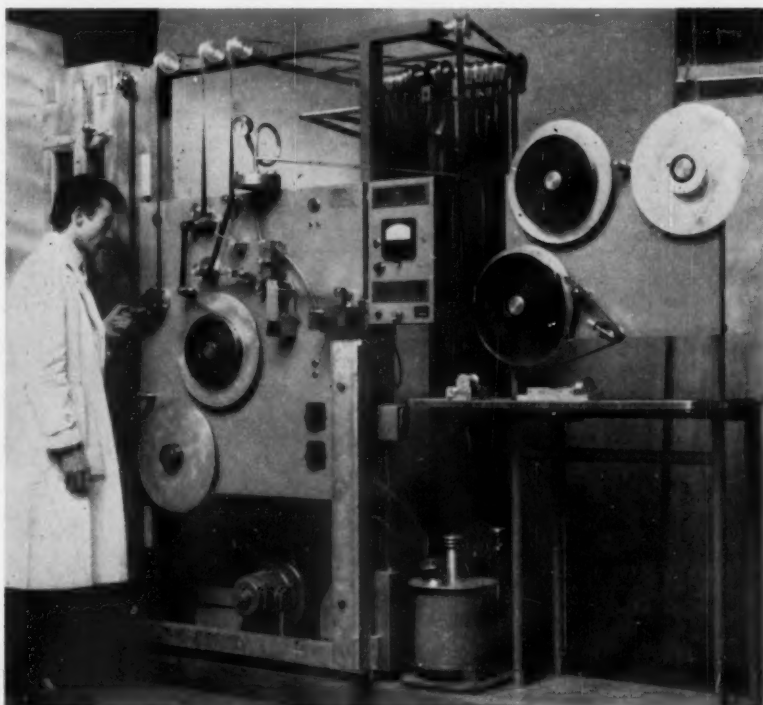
Pyral striping machine for 35mm CinemaScope film.
